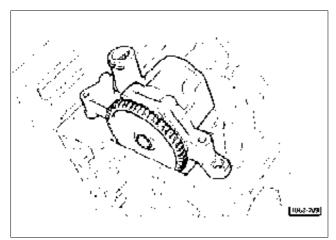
SILVER 100.6 ONLY - Engine block mounted oil pump;
